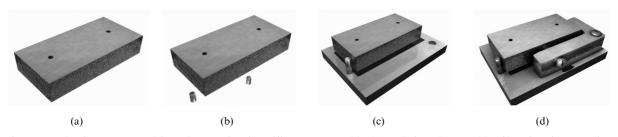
Snapshot images captured from the 3D animation of jig system assembly: (a) workpiece; (b) assembly of locating pins according to the 3-2-1 locating principle; (c) assembly of jig plate; (d) assembly of L-shaped clamp.
